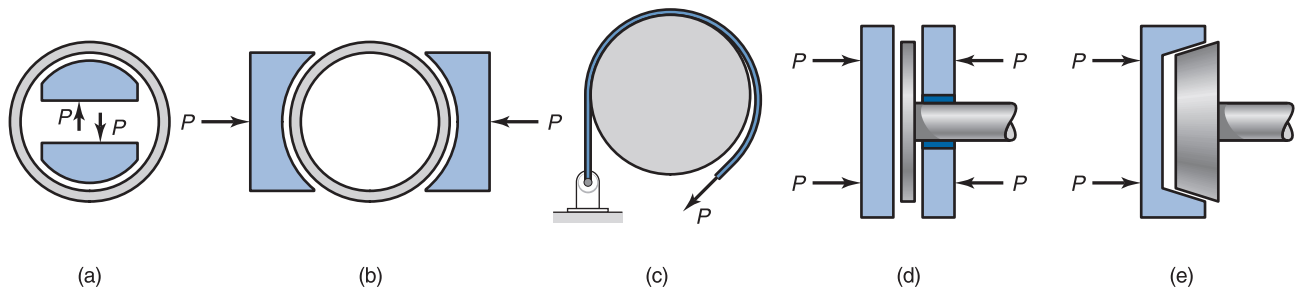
Five types of brake and clutch. (a) Internal, expanding rim type; (b) external contracting rim type; (c) band brake; (d) thrust disk; (e) cone disk.
